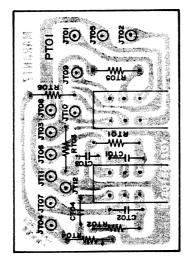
Loudness and Monitor Assembly (PT01) Component Locations
